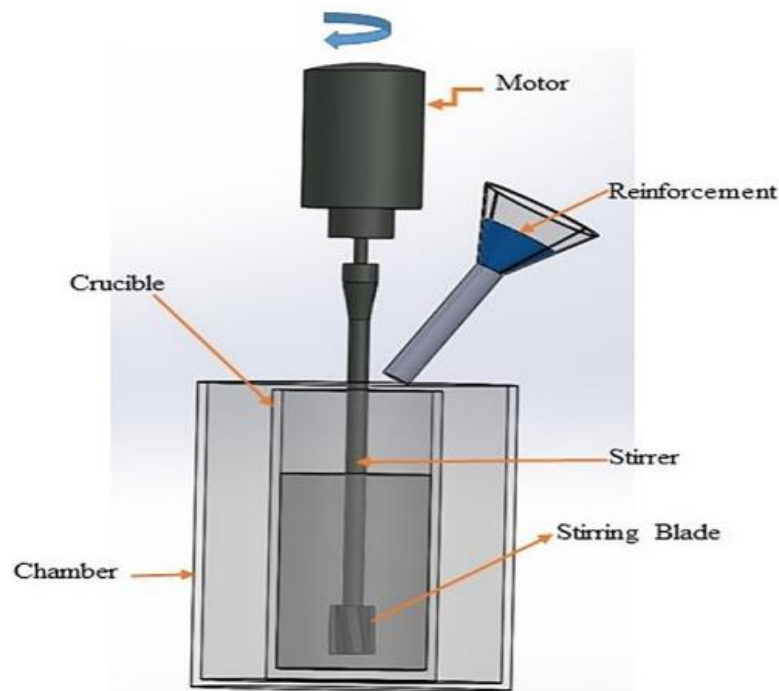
Schematic of Stir-Casting Machine (Islam et al., 2021).
